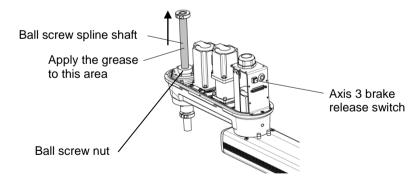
Greasing upper side of ball screw spline unit (KHL-500, KHL-600, KHL-700)
